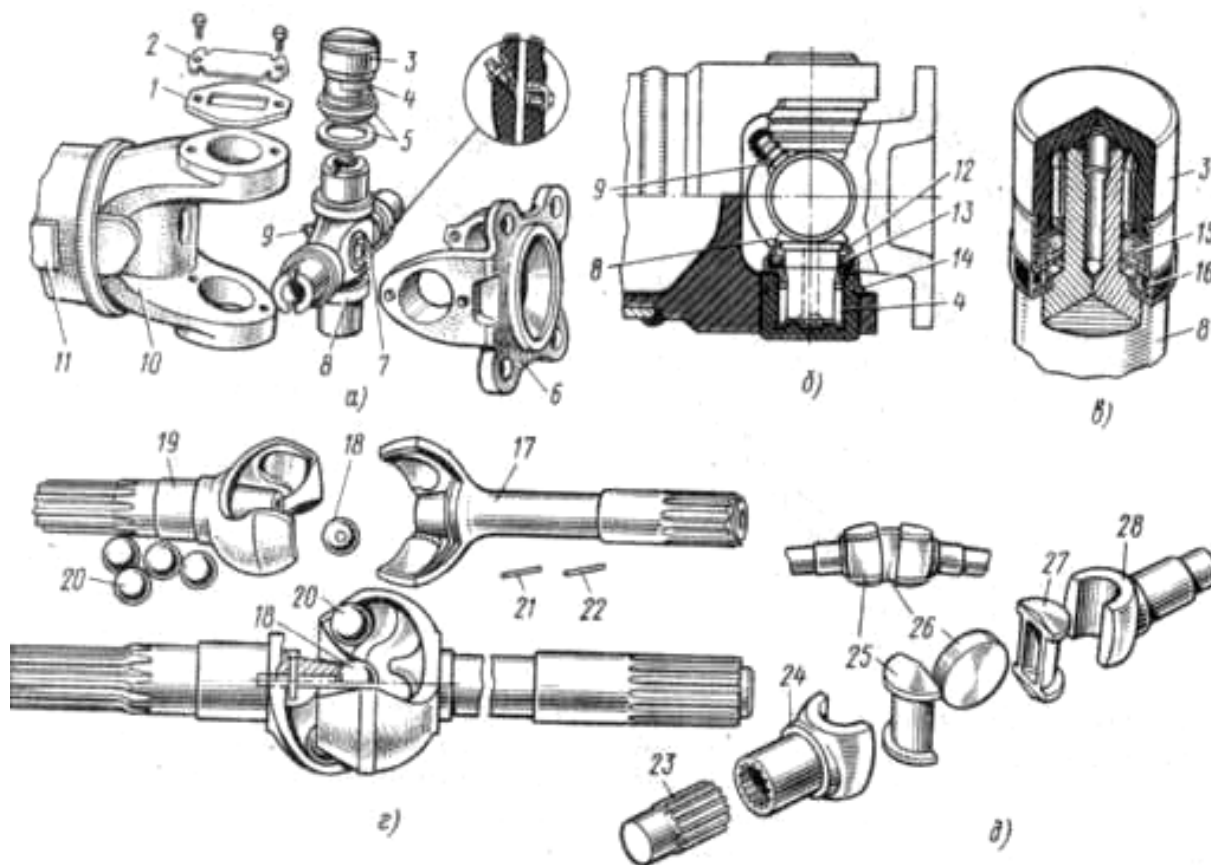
Cardan joints: a - c – of unequal angular velocities; d and e – of equal angular velocities; 1 - cover; 2 - locking plate; 3 - bearing body; 4 - needles; 5 - felt cumulatives; 6, 10, 24 and 28 - plugs; 7 - safety valve; 8 - yoke; 9 - greaser; 11 - cardan shaft; 12 - reflector; 13 - self-tightening cumulative; 14 - retaining ring; 15 and 16 - cumulatives of radial and end seals; 17 - inner lug; 18 - central ball; 19 - outer lug; 20 - leading balls; 21 - finger; 22 - stud pin; 23 - semiaxis; 25 and 27 - semi-cylindrical lugs; 26 - center plate.
